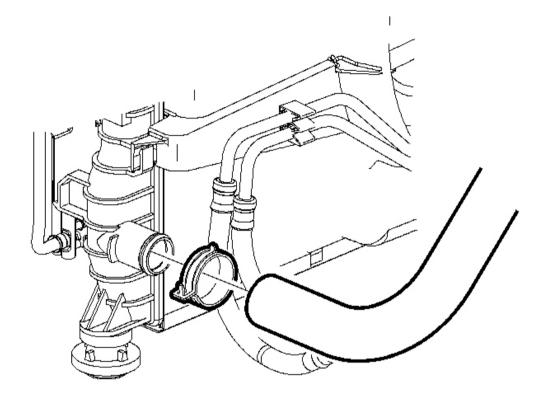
View Of Radiator Outlet (L61) Hose Clamp Courtesy of GENERAL MOTORS CORP.
